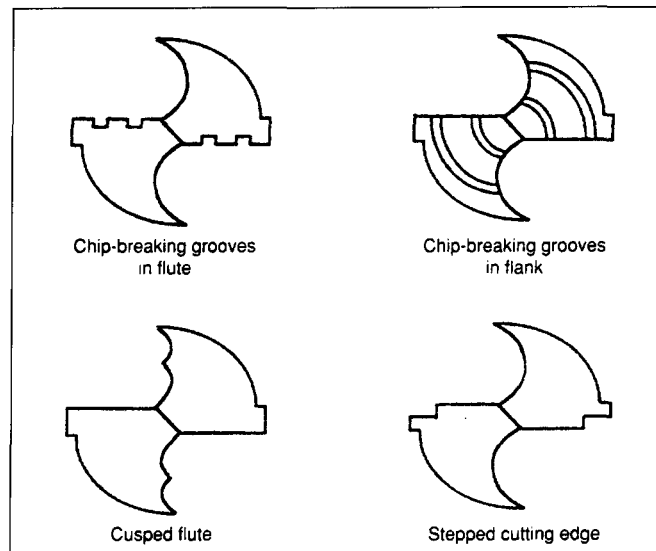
Drill point and flute modifications to improve chip breaking.⁹⁸
